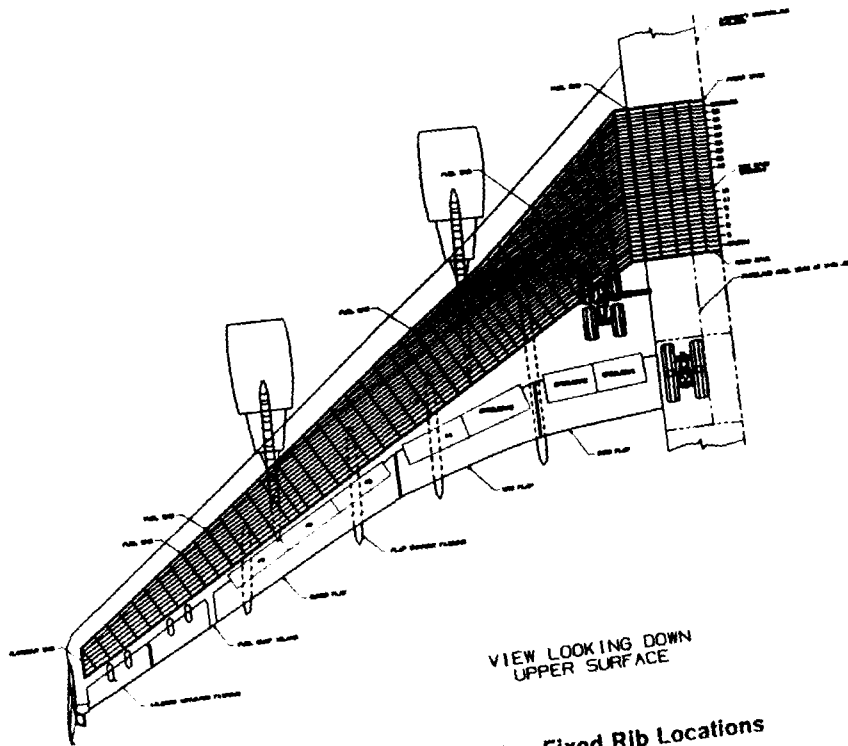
Typical Wing Layout Showing Fixed Rib Locations
